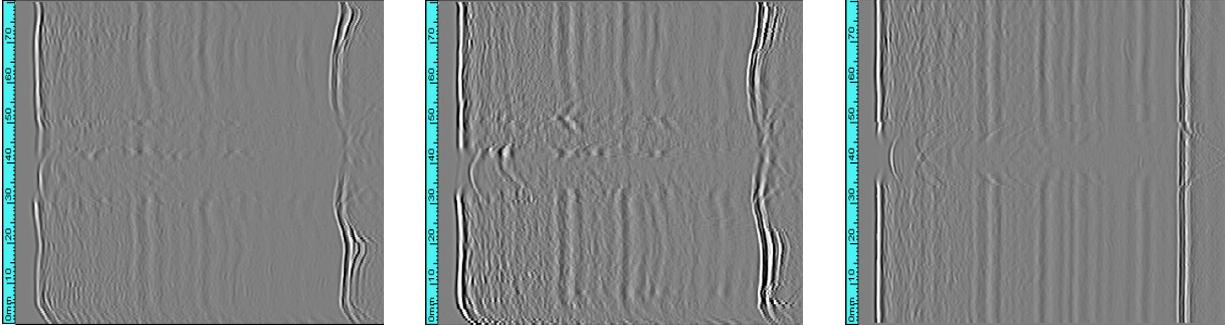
a) : EDM 2 mm in a weld    b) : EDM 4 mm in a weld    c) : EDM 4 mm in base metal
